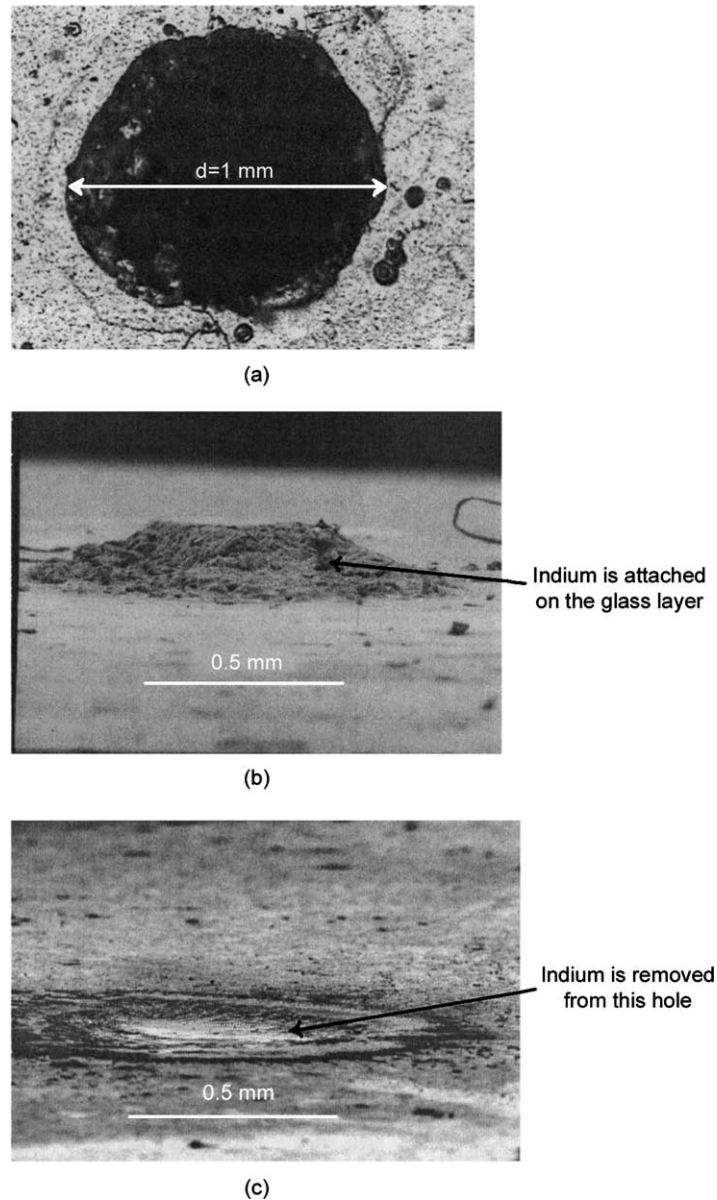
A bonding result: (a) a top view (optical photo) of glass-to-indium bonding spot; (b) a cross-sectional view (SEM) of the bonding spot on the glass layer after the glass-to-indium bond is forcefully broken; (c) a cross-sectional view (SEM) of the bonding spot on silicon substrate.
